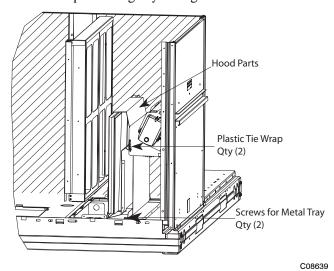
Economizer and Two-Position Damper Hood Parts Location
